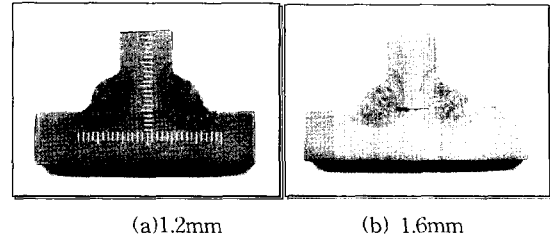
Comparison of H-fillet weld leg and H-fillet weld throat
